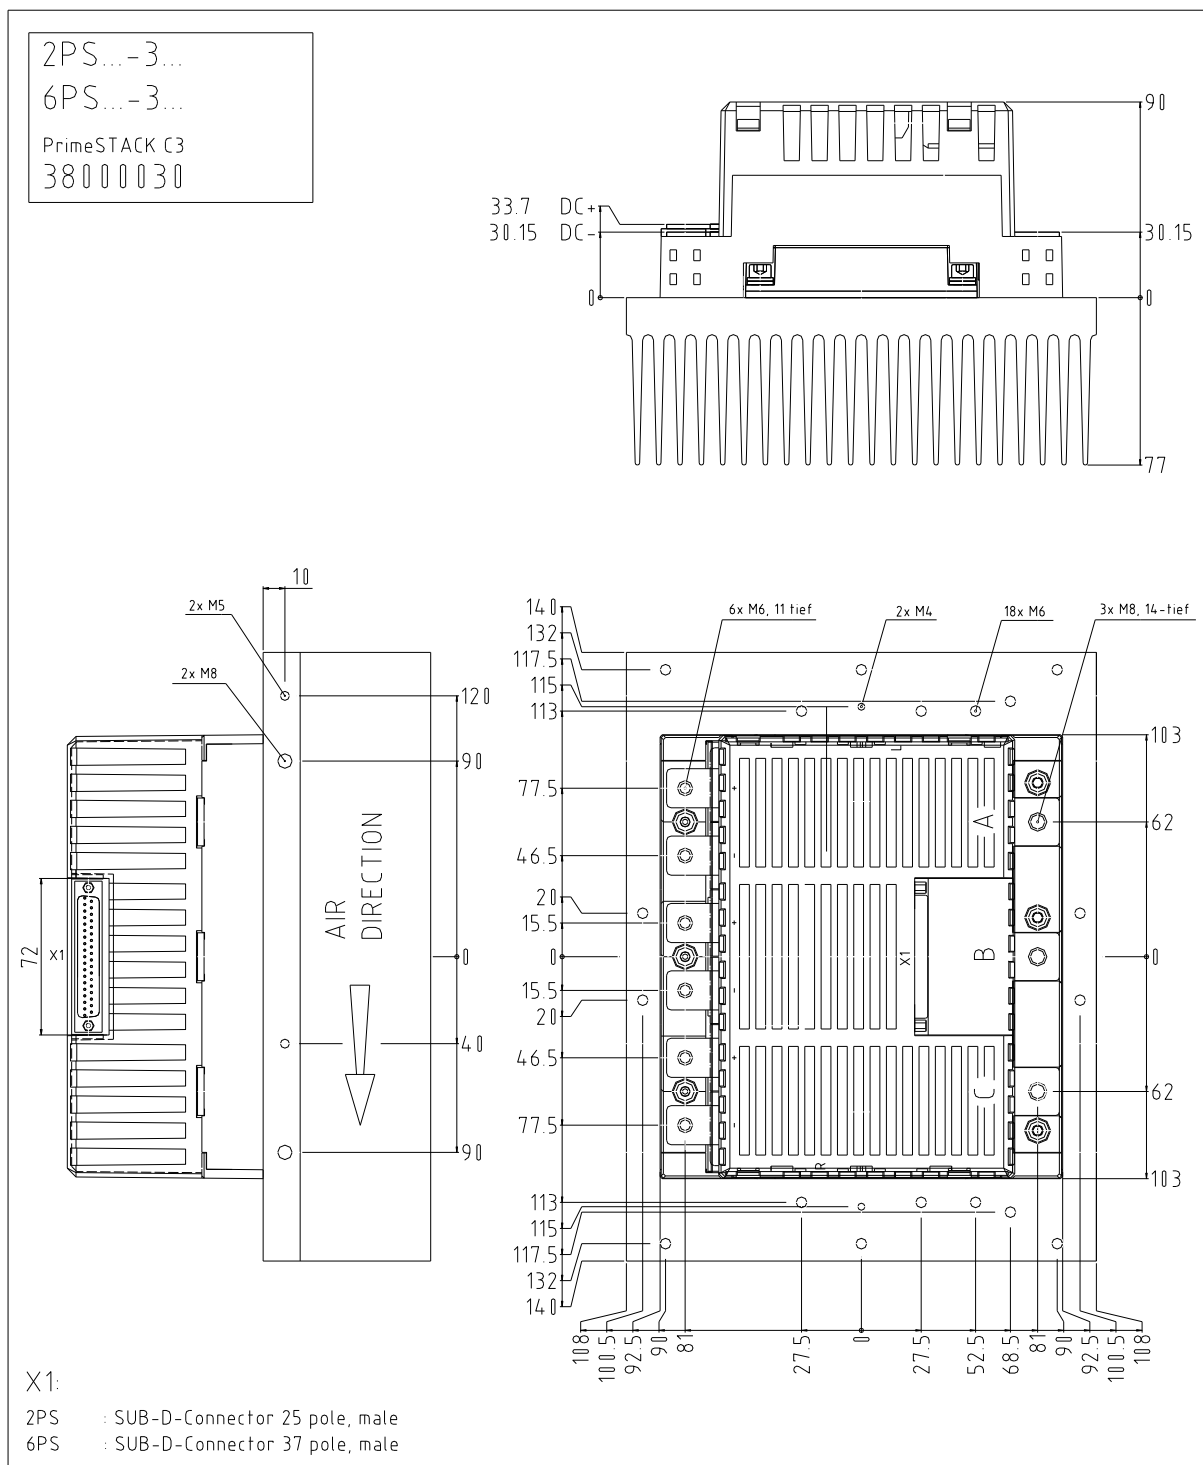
Technical drawing PrimeSTACK in size C3 with air cooler
